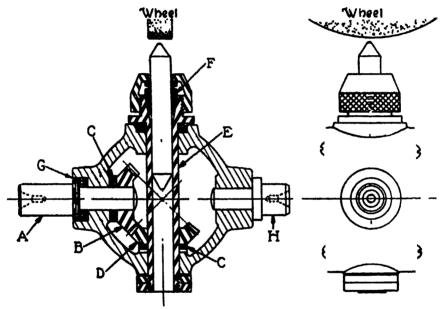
DETAILS OF FIXTURE FOR LOCATING WORK FOR SPHERICAL END GRINDING
